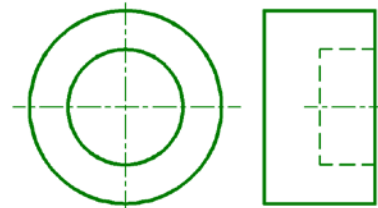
Construction of an oblique drawing using centerline layout method
